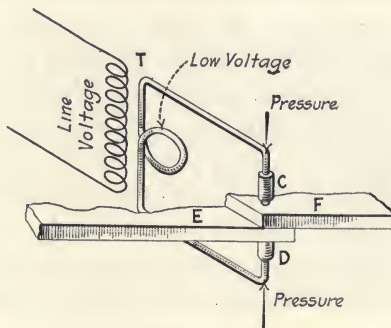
Diagram of spot-welding apparatus.
